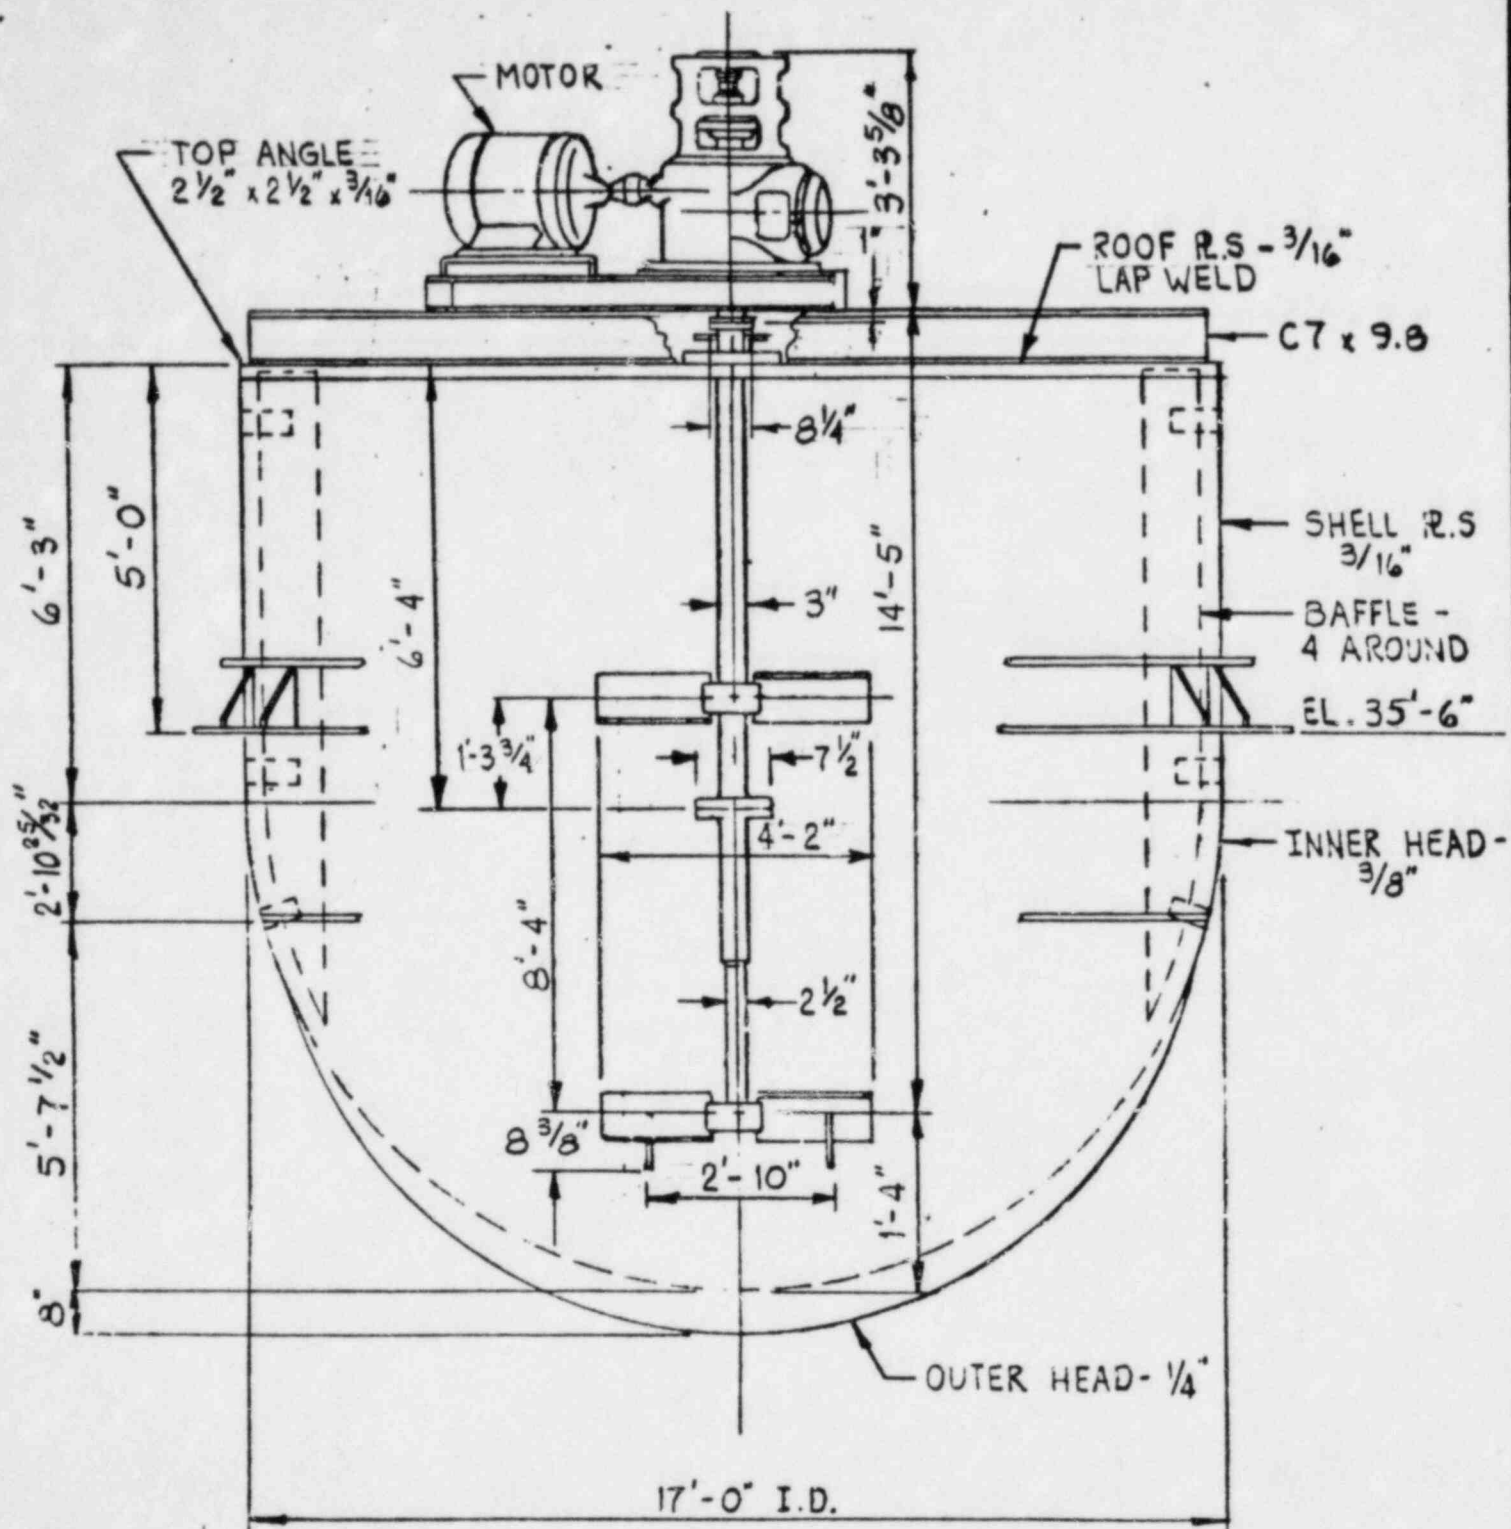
General Arrangement Boric Acid Storage Tank
